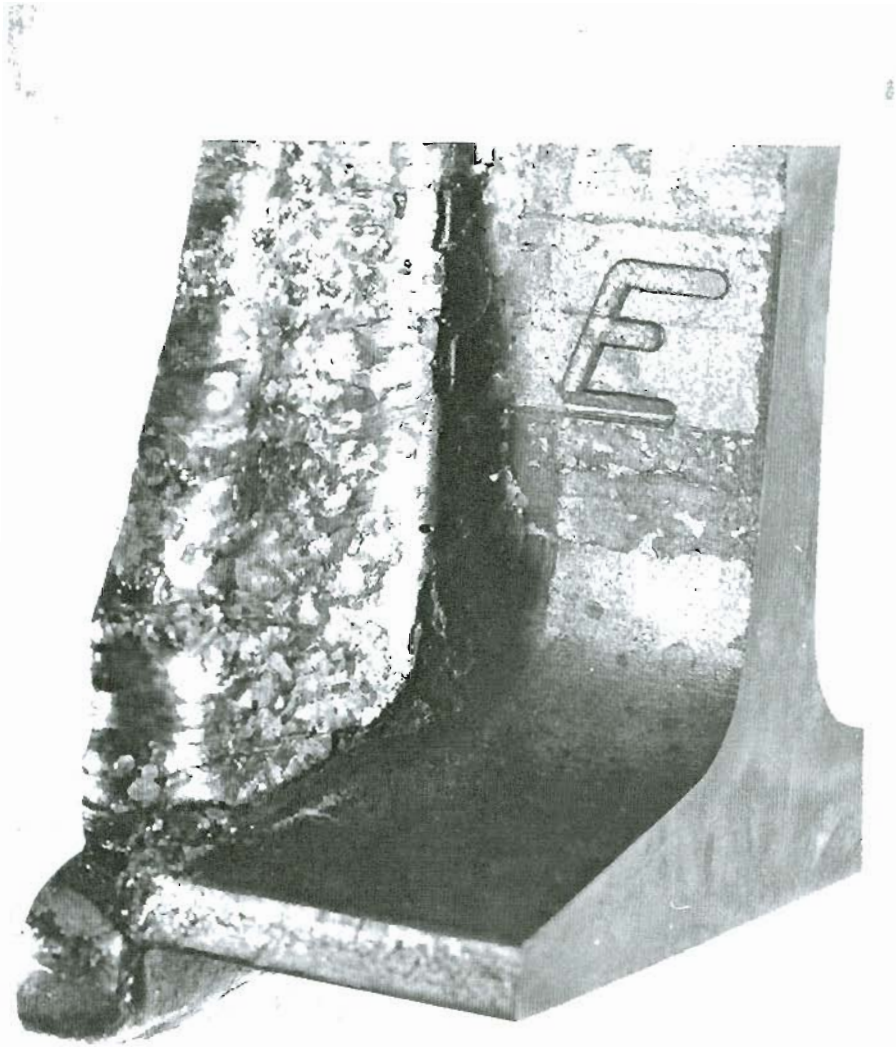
WELD REINFORCEMENT NOTCHING DUE TO OVER COOLING OF THE SLAG BATH.
